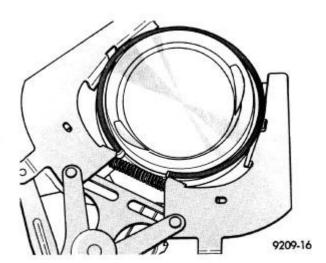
Piston & Connecting Rod Courtesy of CHRYSLER LLC
